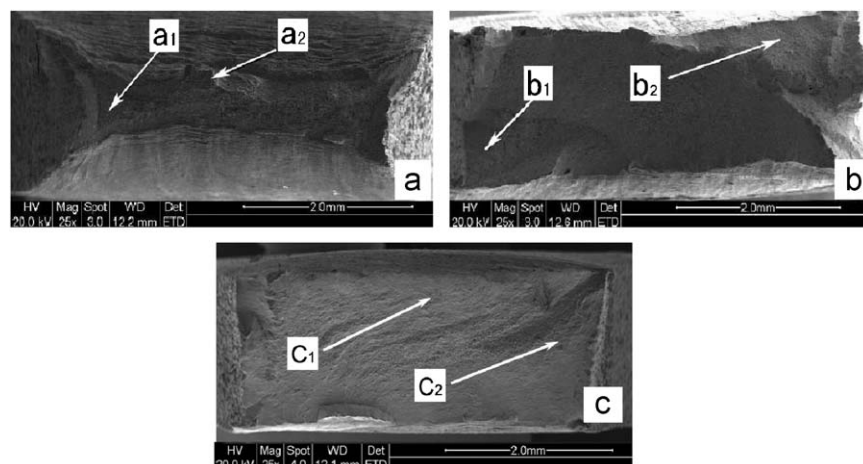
SEM fractograph macrostructure of joints: (a) J_T joint, (b) J_L joint, (c) J_H joint.
